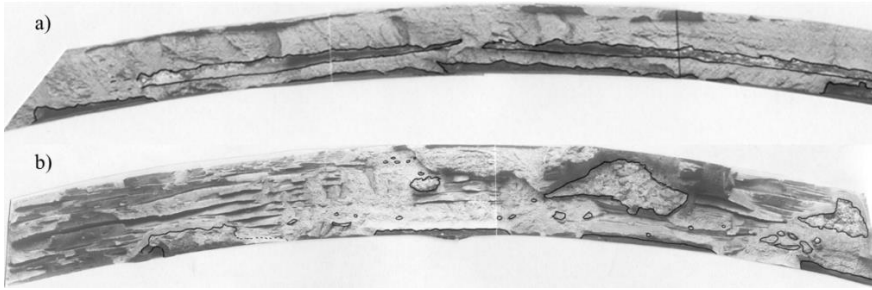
Coplanar adjacent flaws in API X65 pipe weldment made by a) Shield Metal Arc Welding (SMAW), b) Gas Metal Arc Welding (GMAW) (from Soete Laboratory’s archive).
